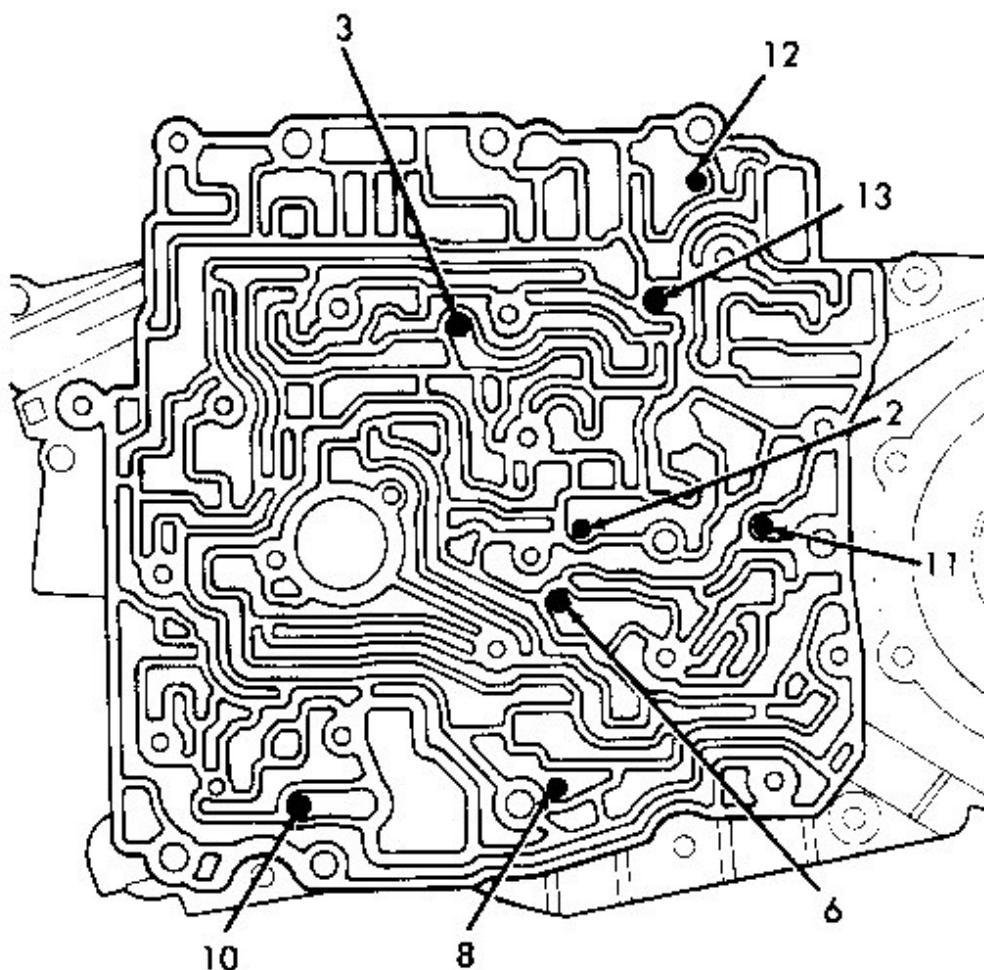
Aligning Channel Plate & 4th Clutch Plate
